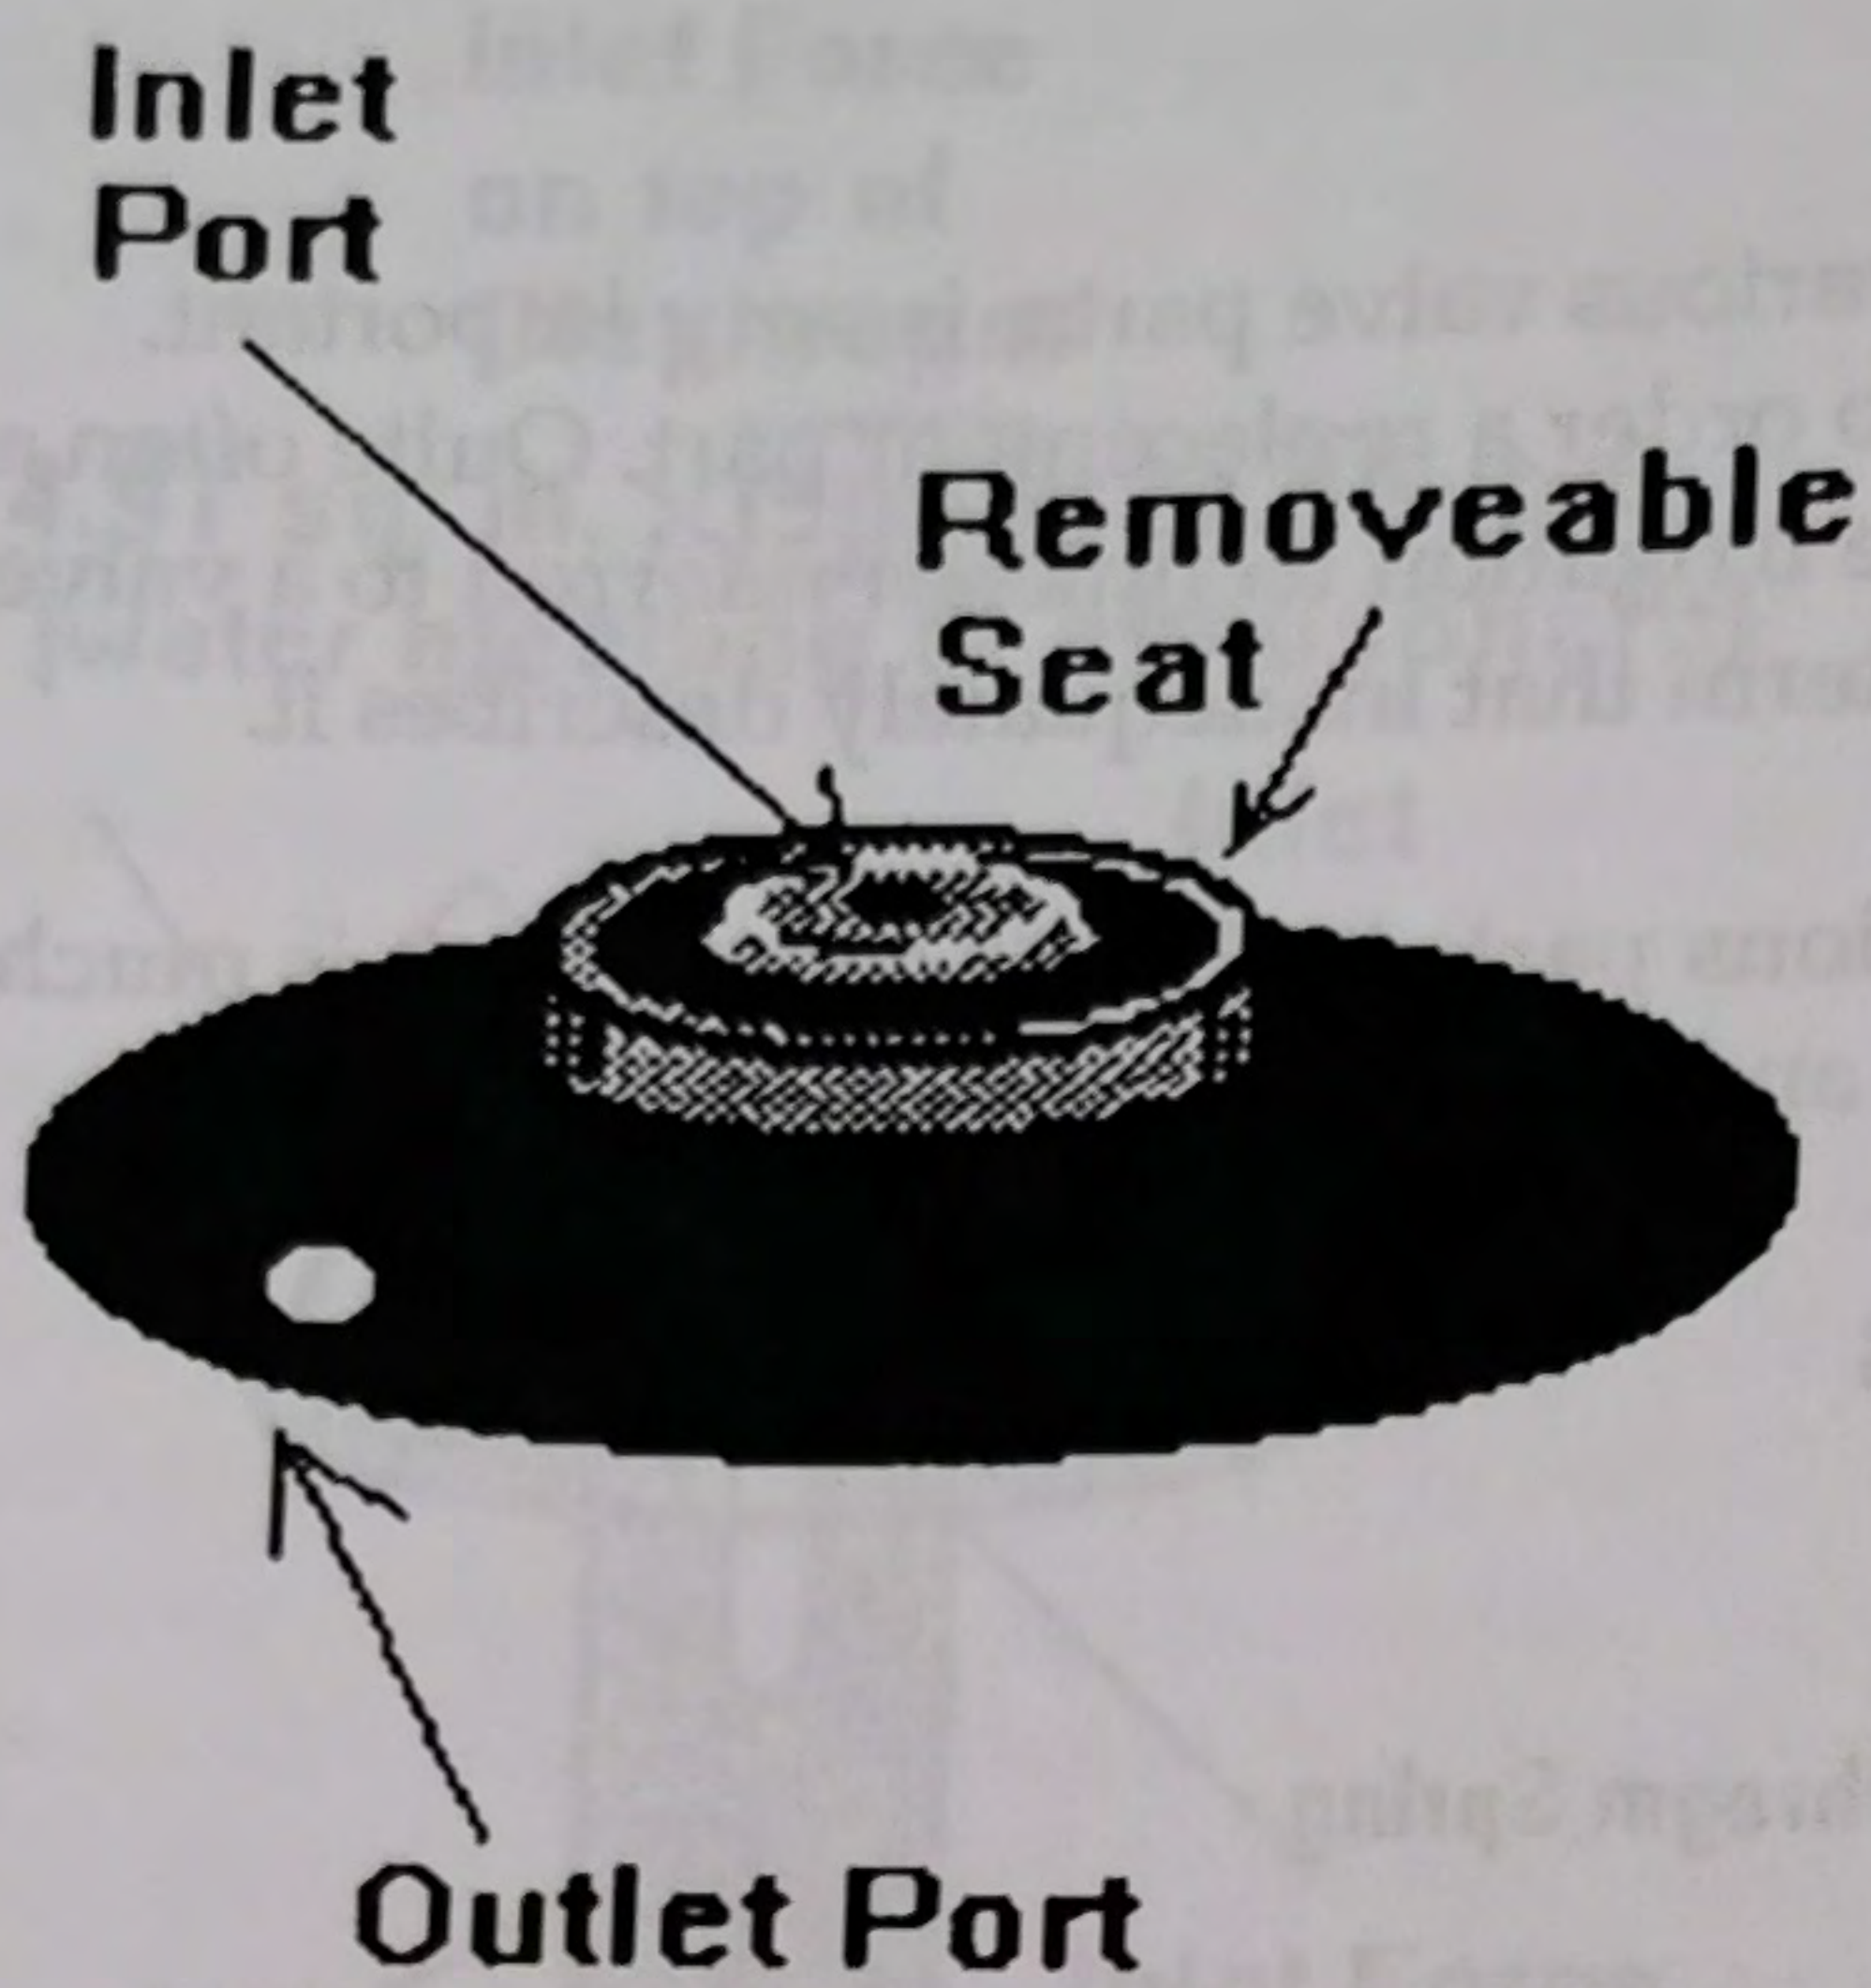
The Griswold™ 2000 series valves have a removable seat assembly attached to the diaphragm assembly.
